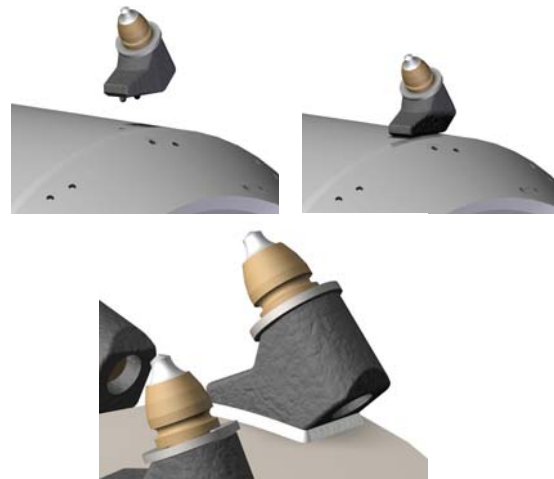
Cutter holder on the roadheader's mantle attached by welding
